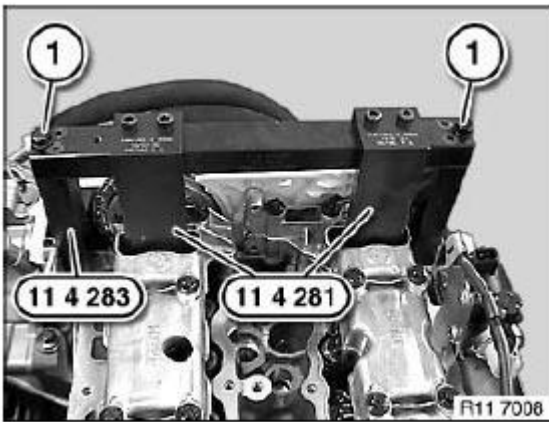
Identifying Screws Secure Special Tool 11 4 283 On Cylinder Head
